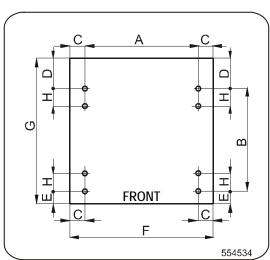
Rigid-mount machines 18-24-28 kg / 40-55-65 lb – medium spin
